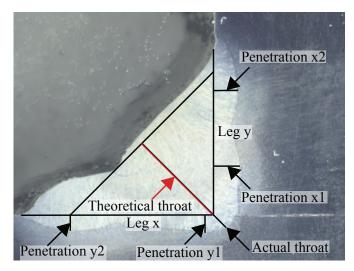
Microscopic image of a multiple pass weld sample with lines indicating the measurements of the weld.
